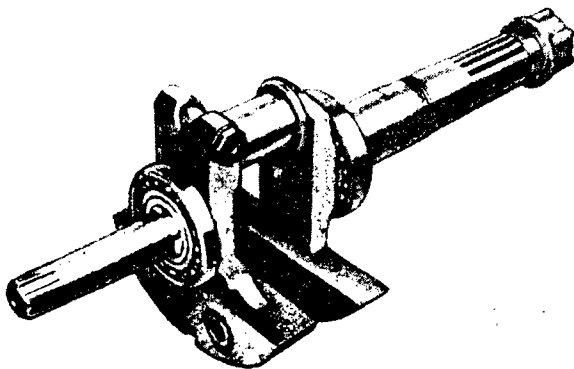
Crankshaft Assembly Part No. A5891 with Seventh Order Torsional Vibration Damper — Showing Front and Rear Main Bearings and Propeller Thread Protection Cap.
